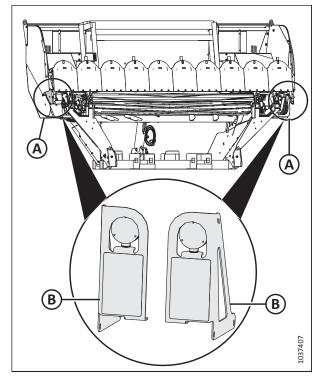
Hazard/Brake Light Assembly Shipping Location – Bottom of Header
